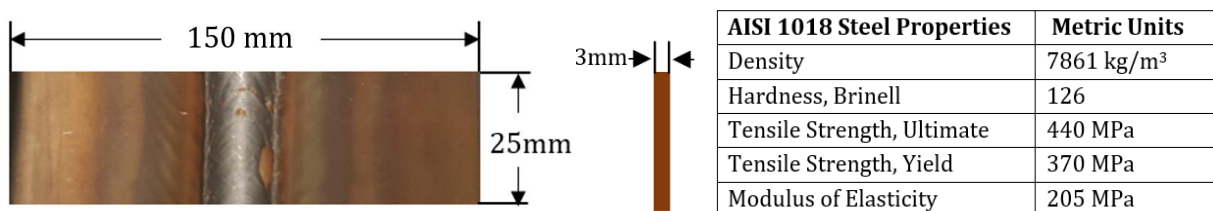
Welded work-piece sample (GVSU Workshop)
